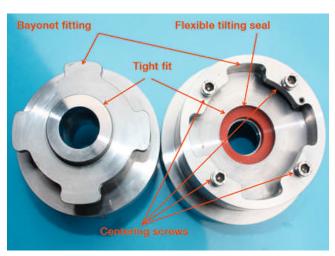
Open tilting die that can be mounted and removed with a simple twisting action thanks to a special bayonet fitting
